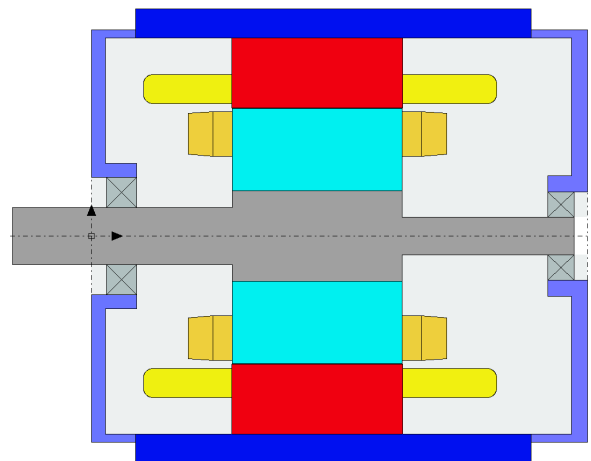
UMP-3C3-210-25-4 housing in MotorCAD
